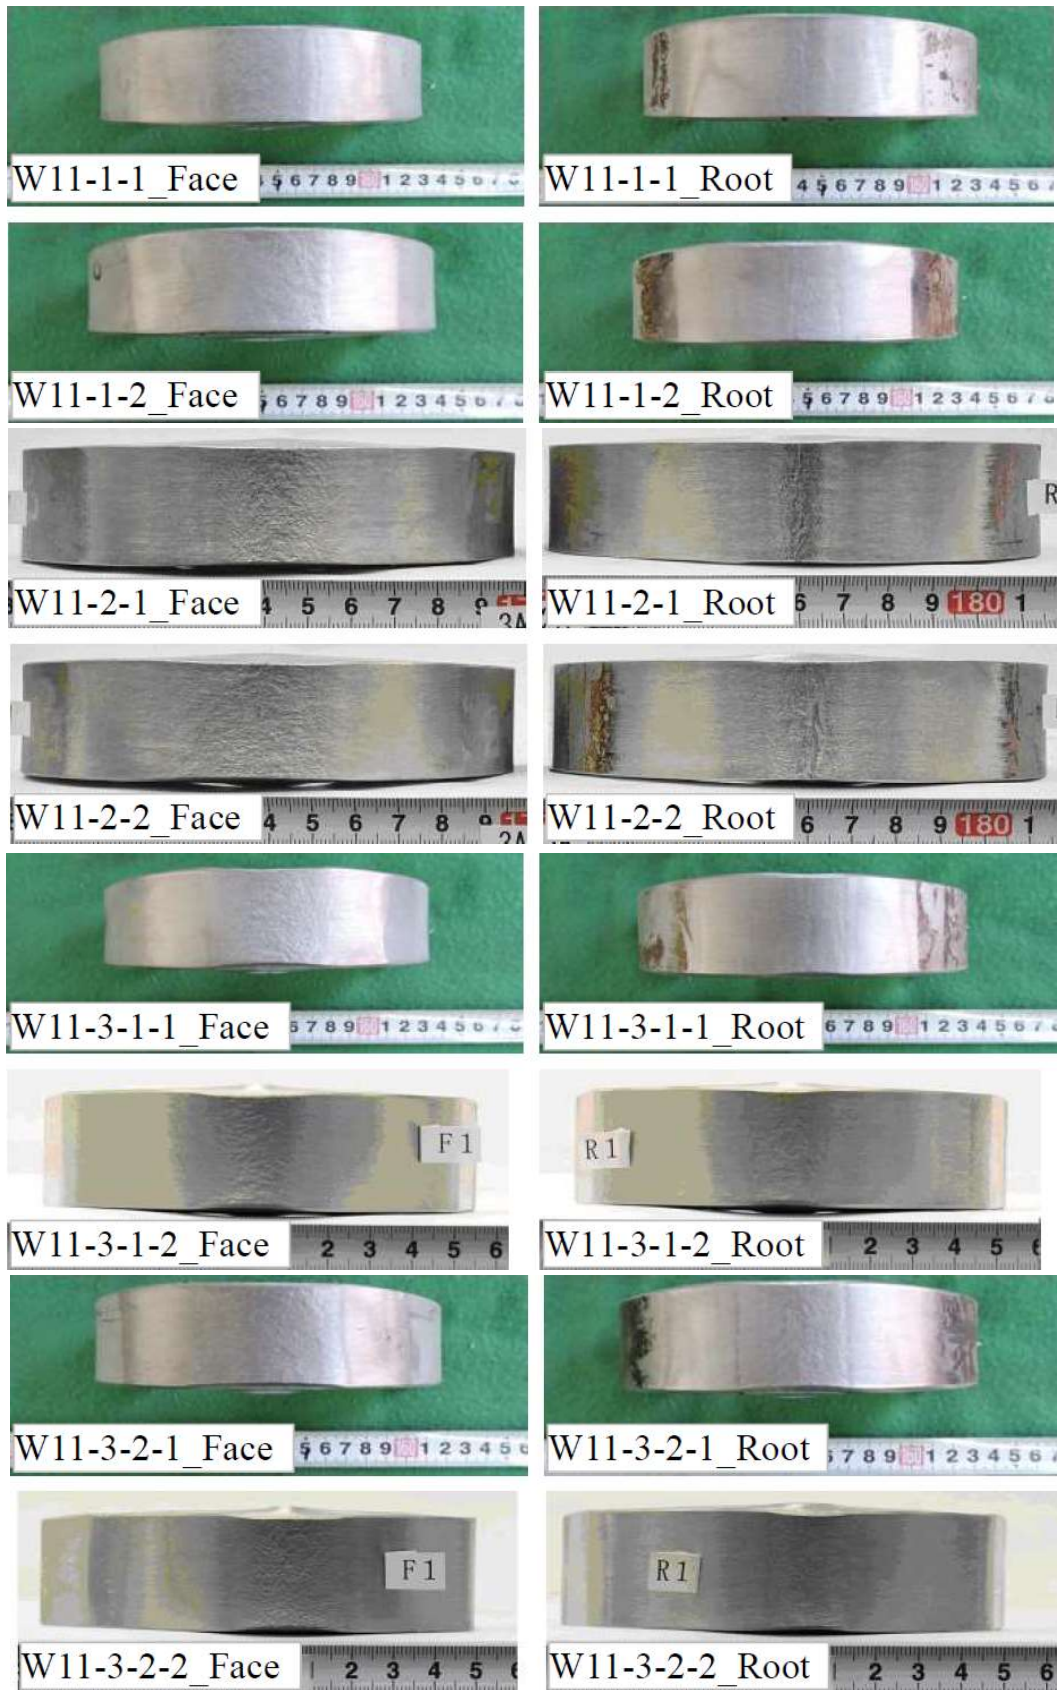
Photograph of specimens made of KSUS329J3L stainless steel after bending tests.
